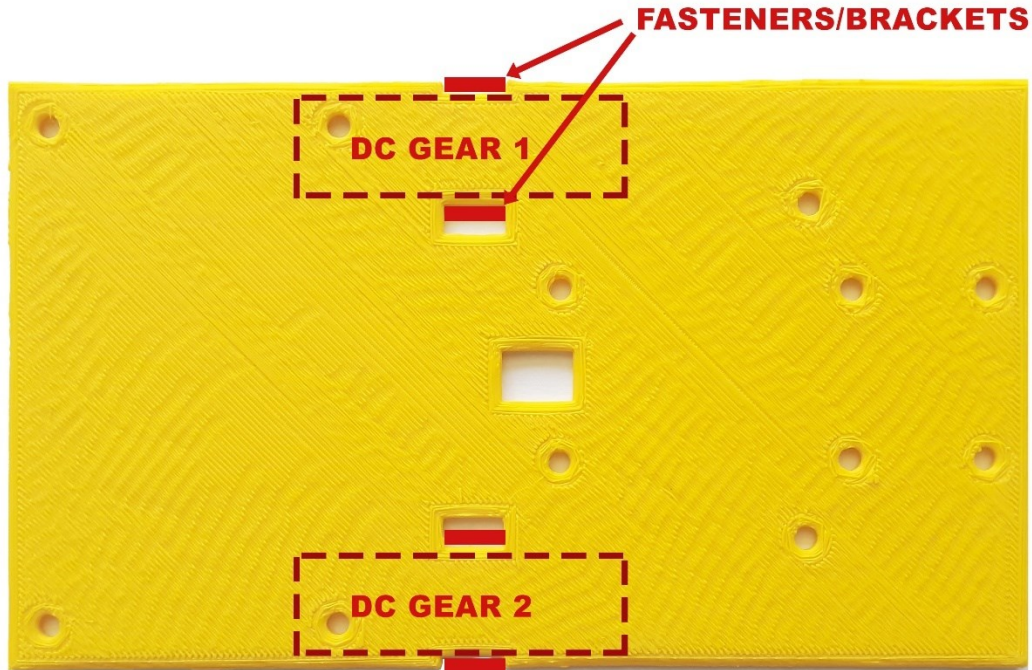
Diagram showing where the two DC gear motors and the 4 fasteners/brackets should be mounted
